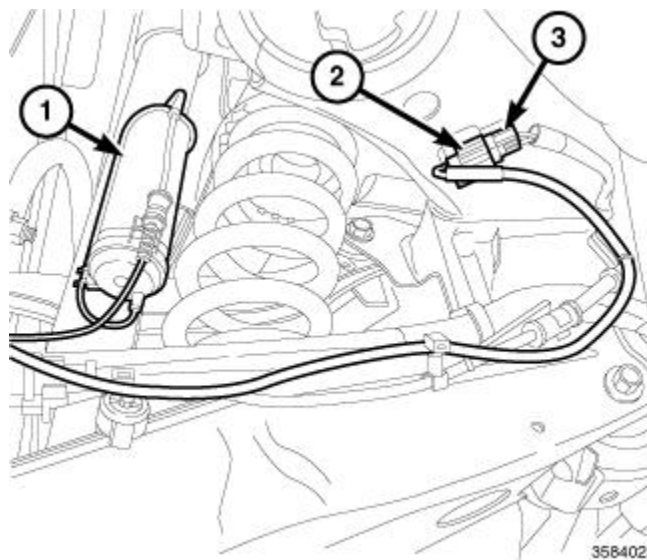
Shock Solenoid Assembly & ADS Harness Connector
